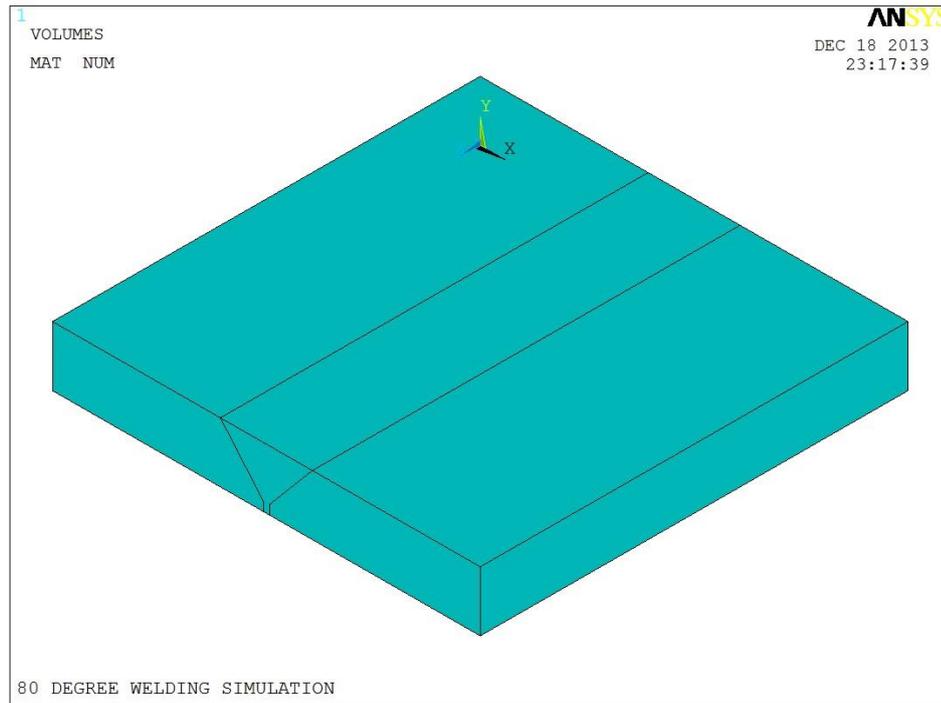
Geometry model for 80 Degree of Included bevel angle of a single V butt weld
